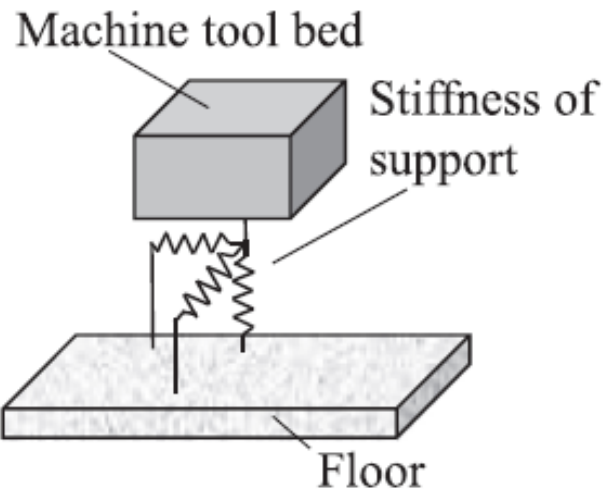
3D schematic for machine tool support stiffness [29].
